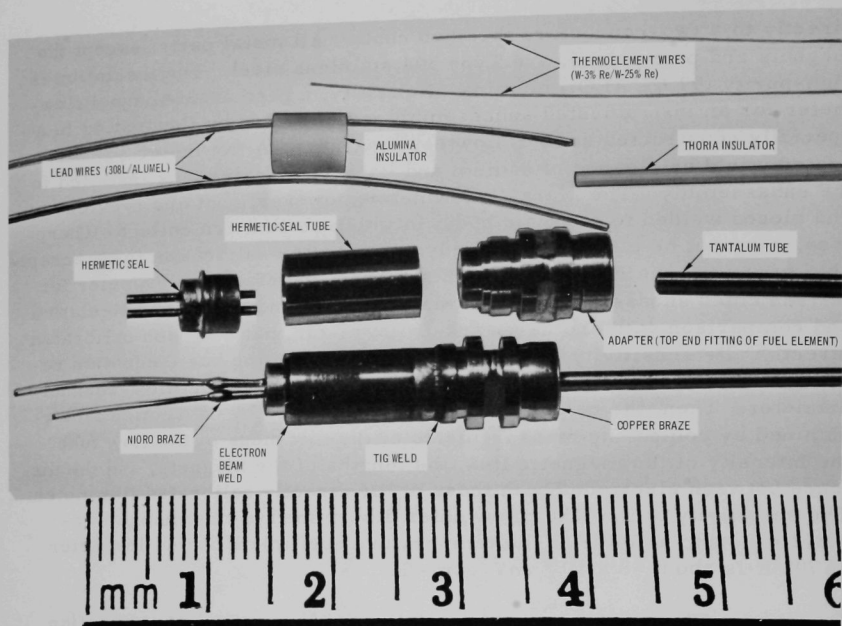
Components of Fuel-centerline Thermocouple of Subassembly XX01
